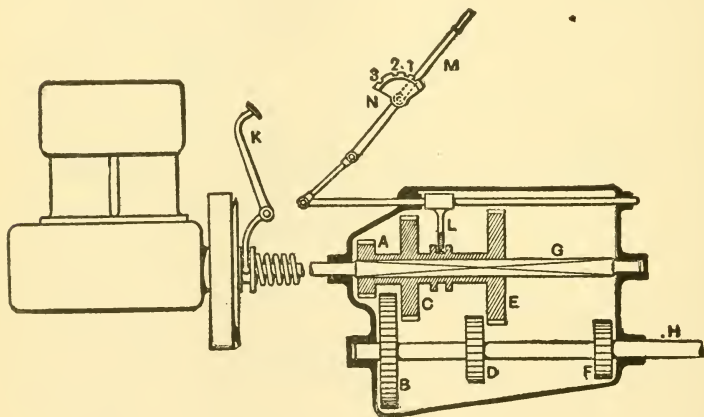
A transmission case with cover removed, showing gears in "neutral position." The parts are as follows: A, 1st speed sliding gear; B, 1st speed driven gear; C, 2d speed sliding gear; D, 2d speed driven gear; E, 3d speed sliding gear; F, 3d speed driven gear; G, square portion of driving shaft, carrying A, C and E; H, driven shaft, carrying B, D and F; K, clutch pedal; L, gear striking fork; M, change speed lever; N, change speed quadrant.
